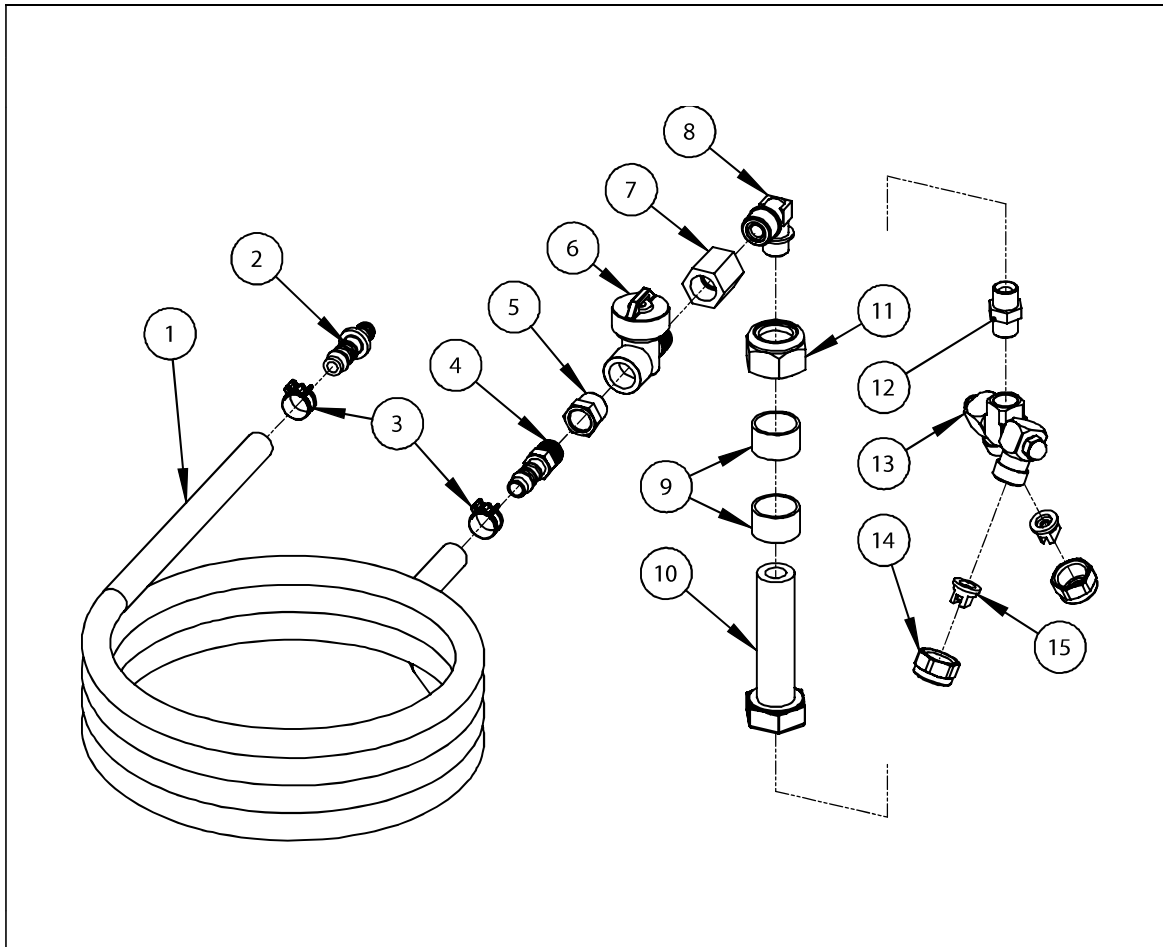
Hi-Flo Nozzle Assembly, Twin
